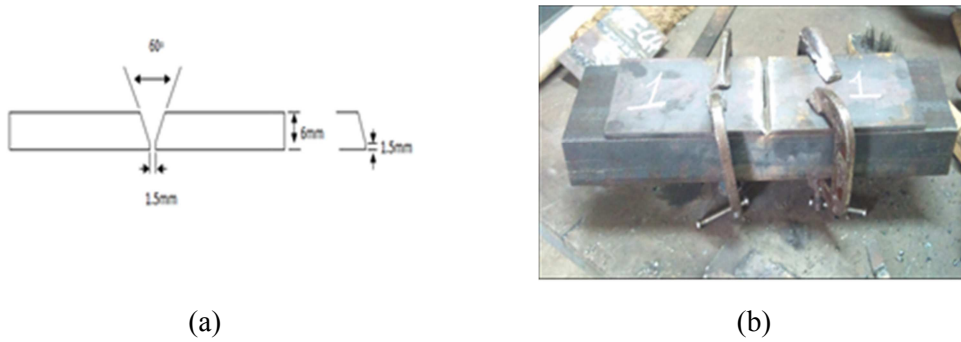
Weld Details: (a) Weld groove details, (b) Photograph of the Weld setup
